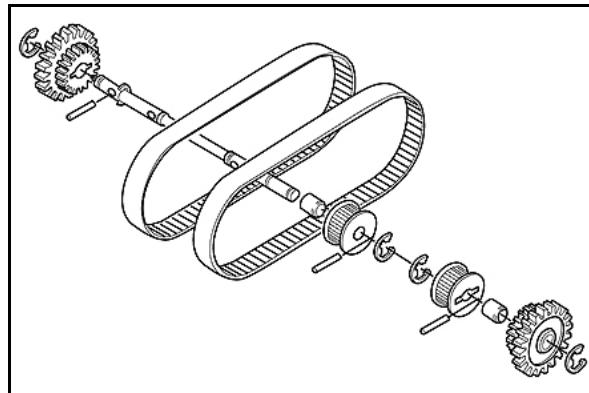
Complete Transport Timing Belt Shaft Component Disassembly
